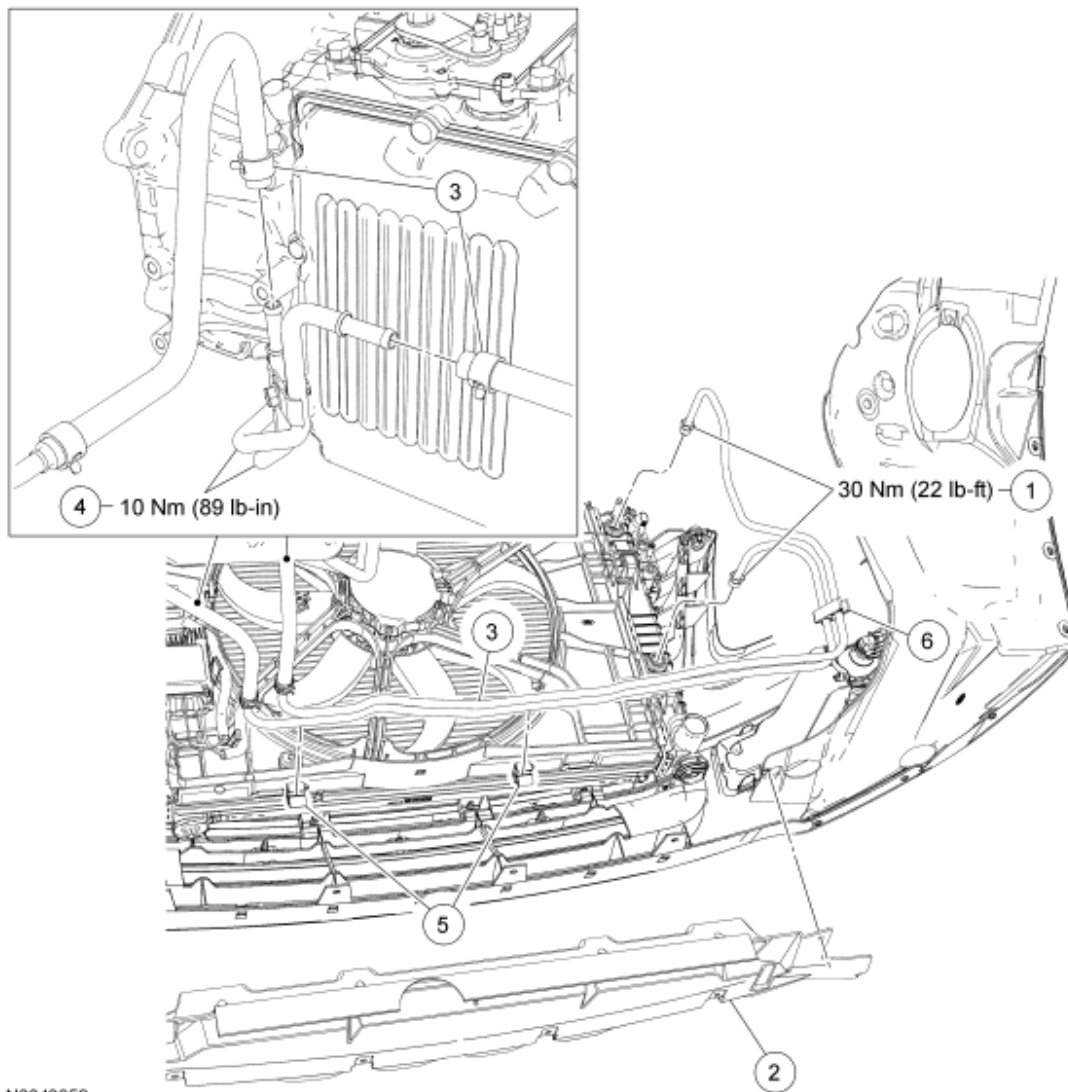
Exploded View Of Transmission Fluid Cooler Tubes With Torque Specifications - 6-Speed
